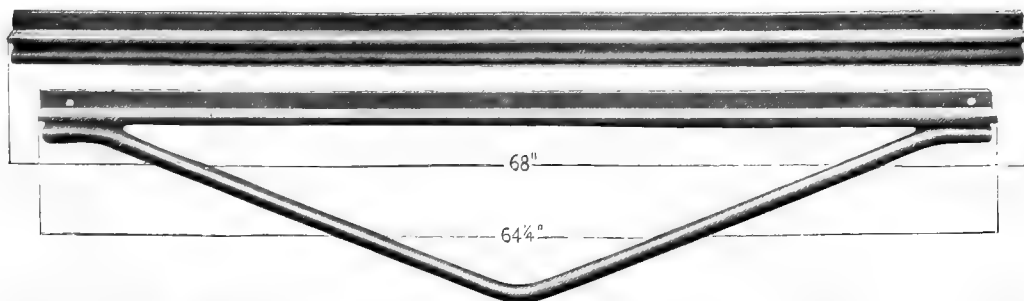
Method of Manufacture of Davis Solid Truss Brake Beam. Davis Brake Beam Company.
